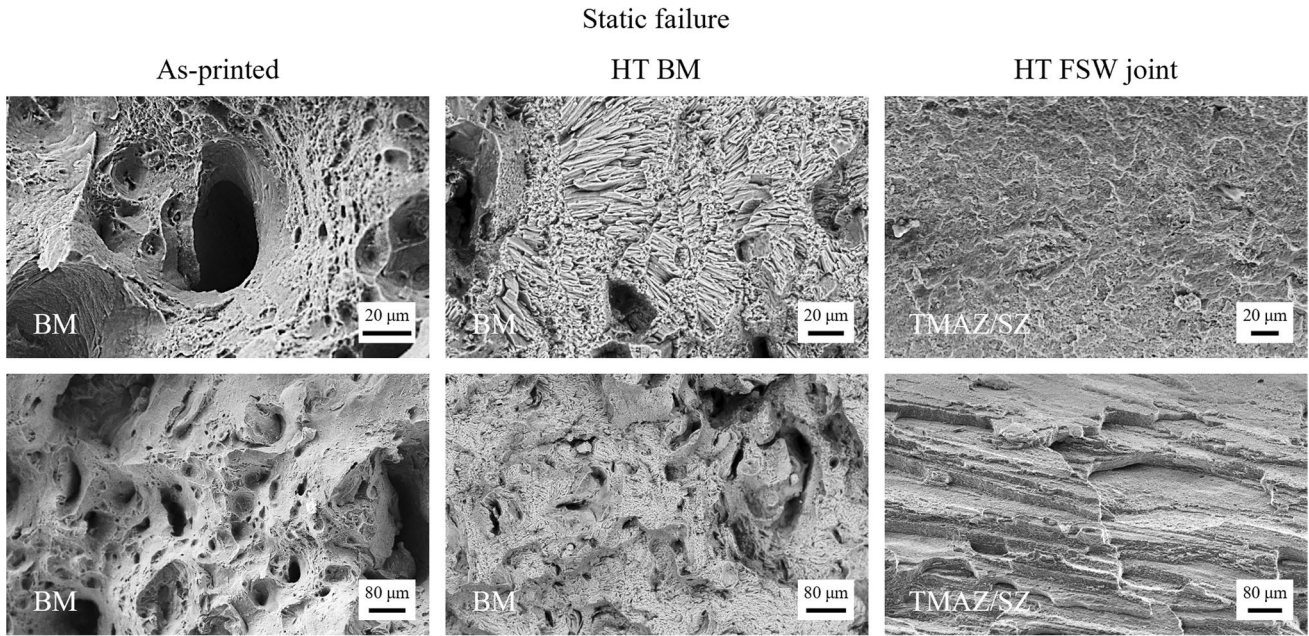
High magnification of significant details of the fracture surfaces
